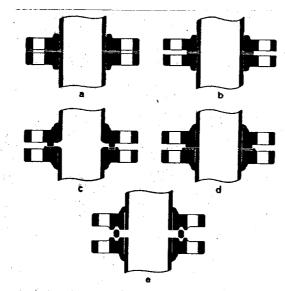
Methods of facing flanges: (a) plain face; (b) raised face; (c) tongue-and-groove face; (d) male and female face; (e) ring joint.
